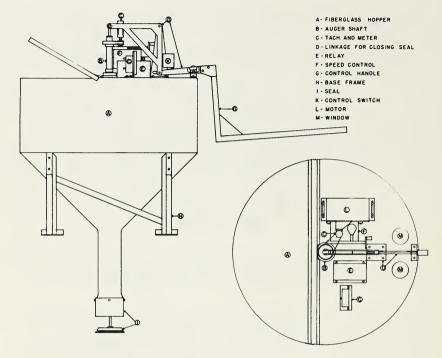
Auger dispenser drawing No. 1, assembly view.
